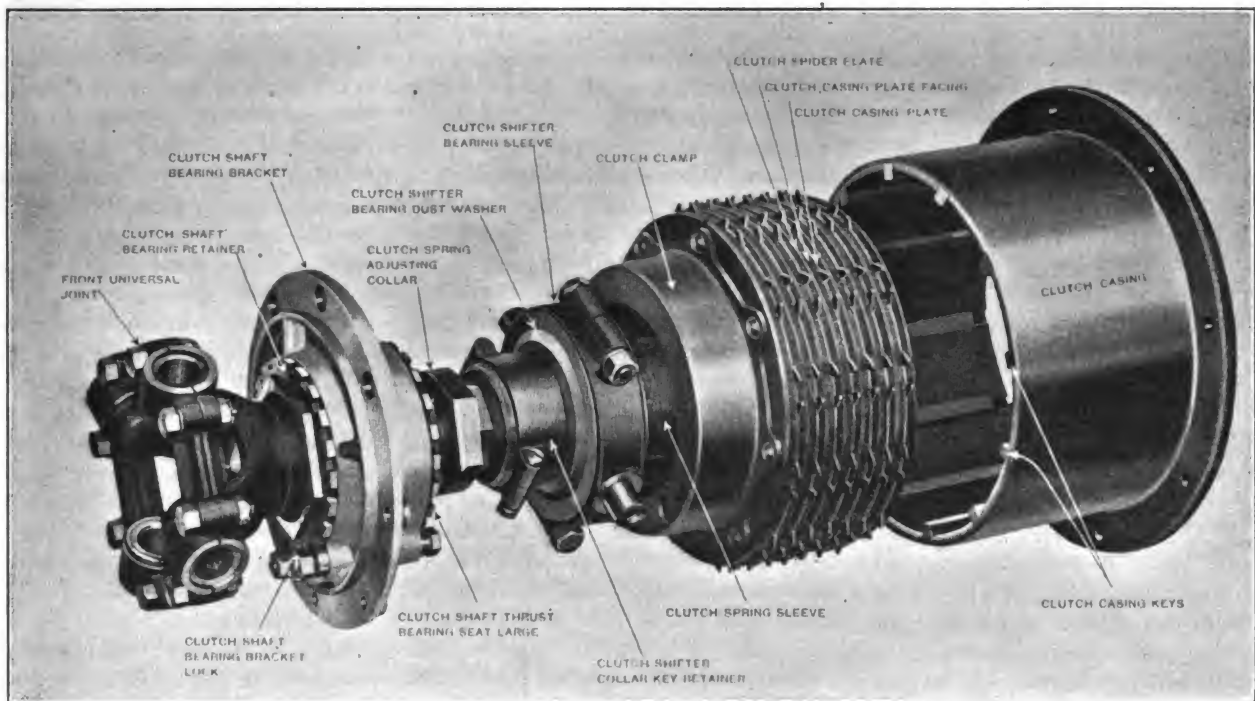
DRY PLATE CLUTCH, WITH UNIVERSAL JOINT AND OTHER PARTS
